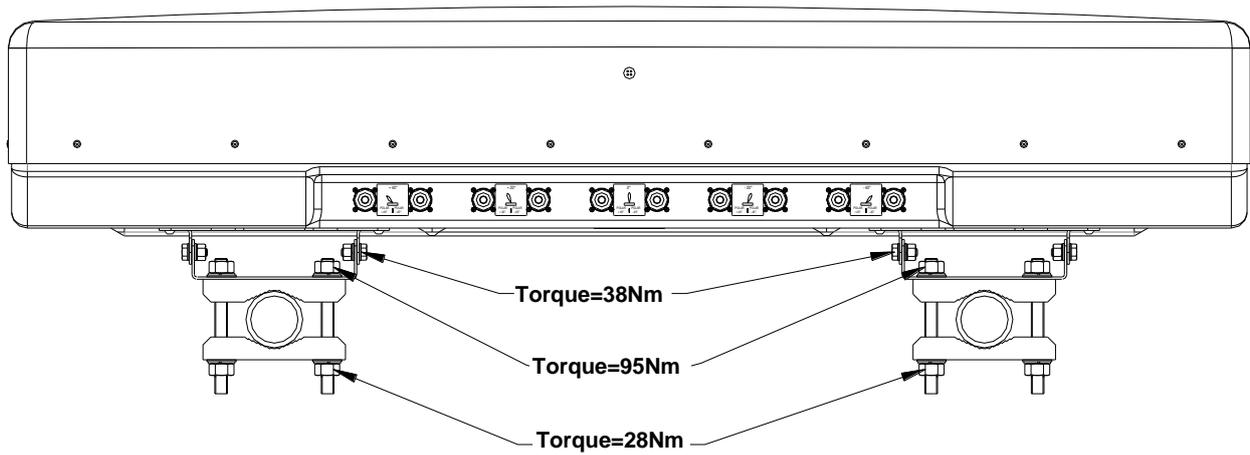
Fixed Downtilt Mounting Bracket Assembled to Antenna & pole
